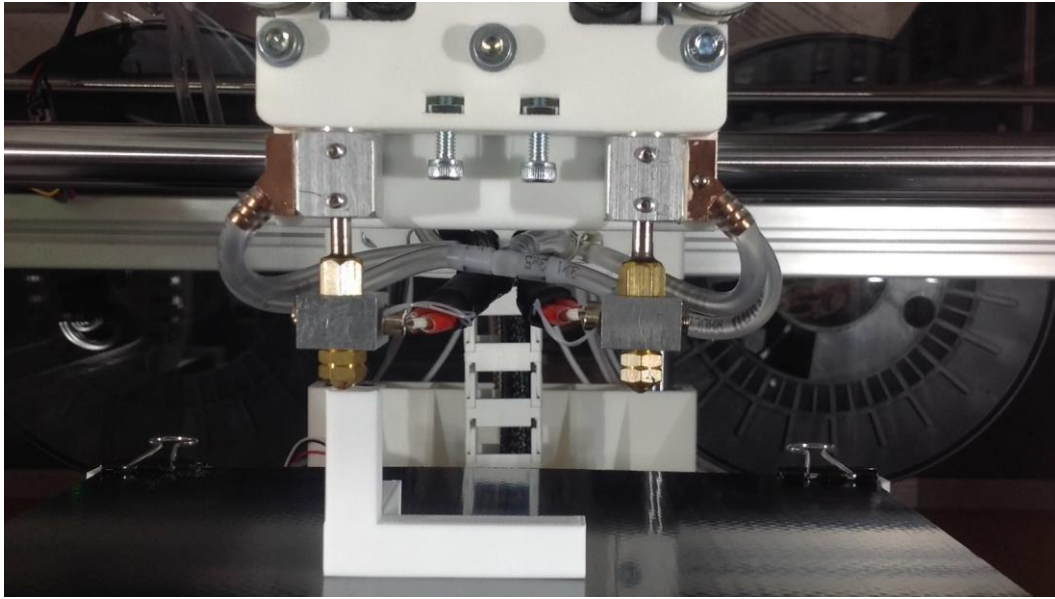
Example of FDM 3D printed depositing a layer of molten plastic for the upper layer of a CAD design.
